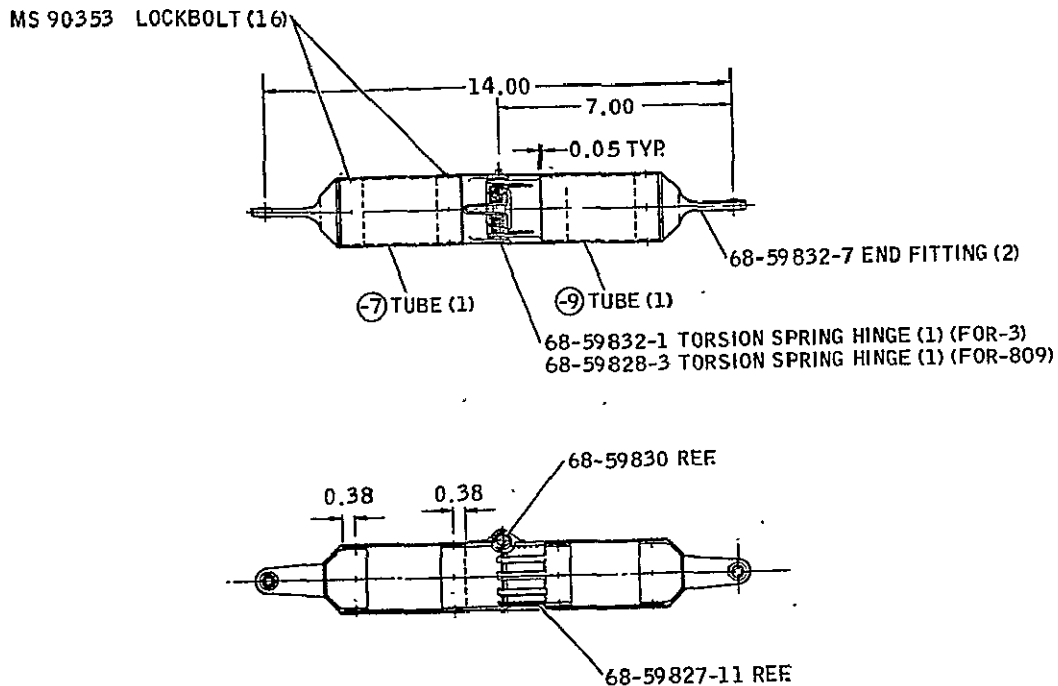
Test Specimen, Torsion Spring Hinge Assembly
